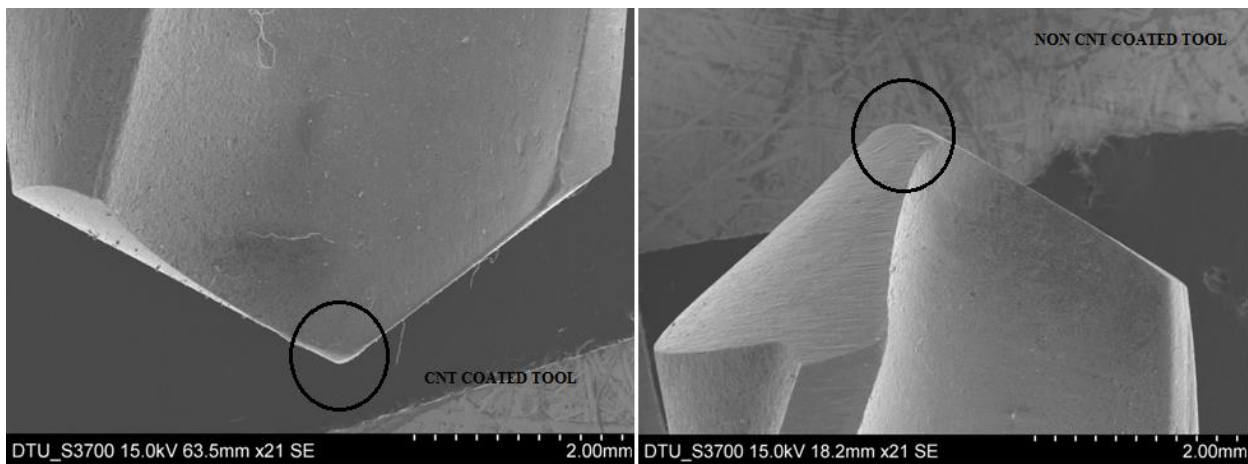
SEM(Scanning Electron Images) of coated and non coated HSS drilling tool after machining on ductile material
